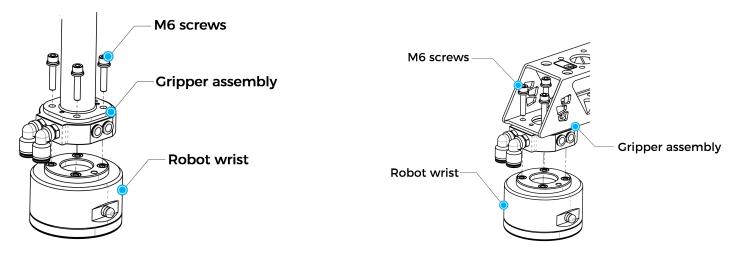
Installation of the Gripper Assembly on the Robot Wrist
